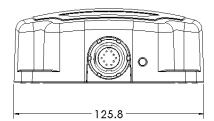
IDP-680 Side View Enclosure Dimensions (mm)
